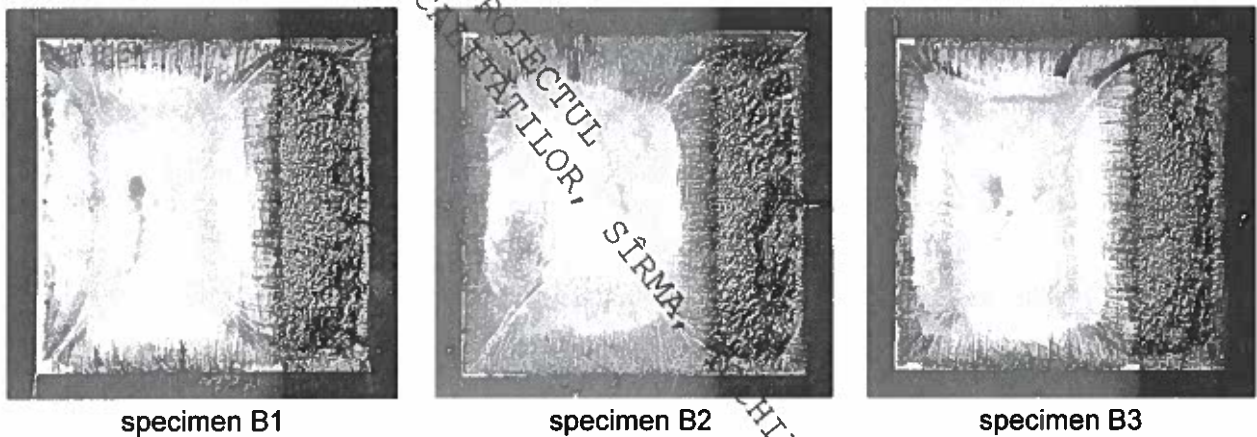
Top view of the fracture surfaces (one half of each specimen)
